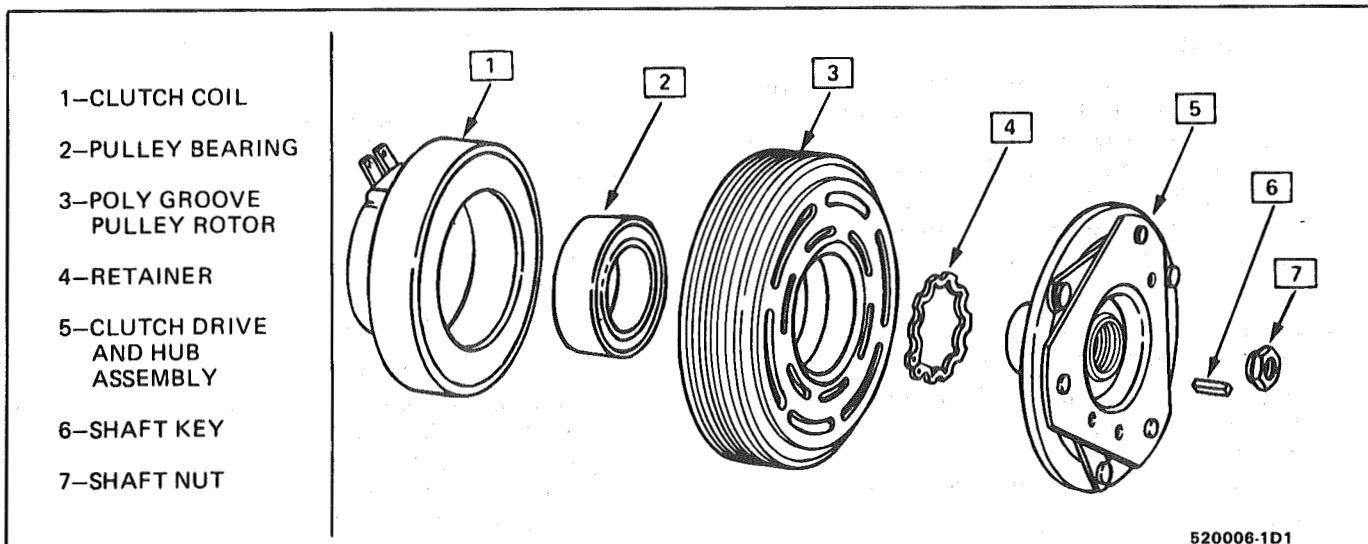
Disassembled View of Poly Groove Pulley Drive
